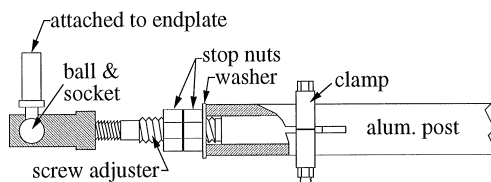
Spring-side end of an R2 adjustable post assembly partially cut away to show the screw adjuster on the inside of post.
